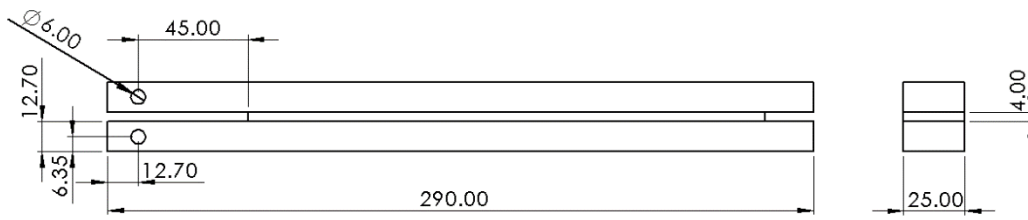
Specimens' geometry adapted from ASTM D-3433-99.
